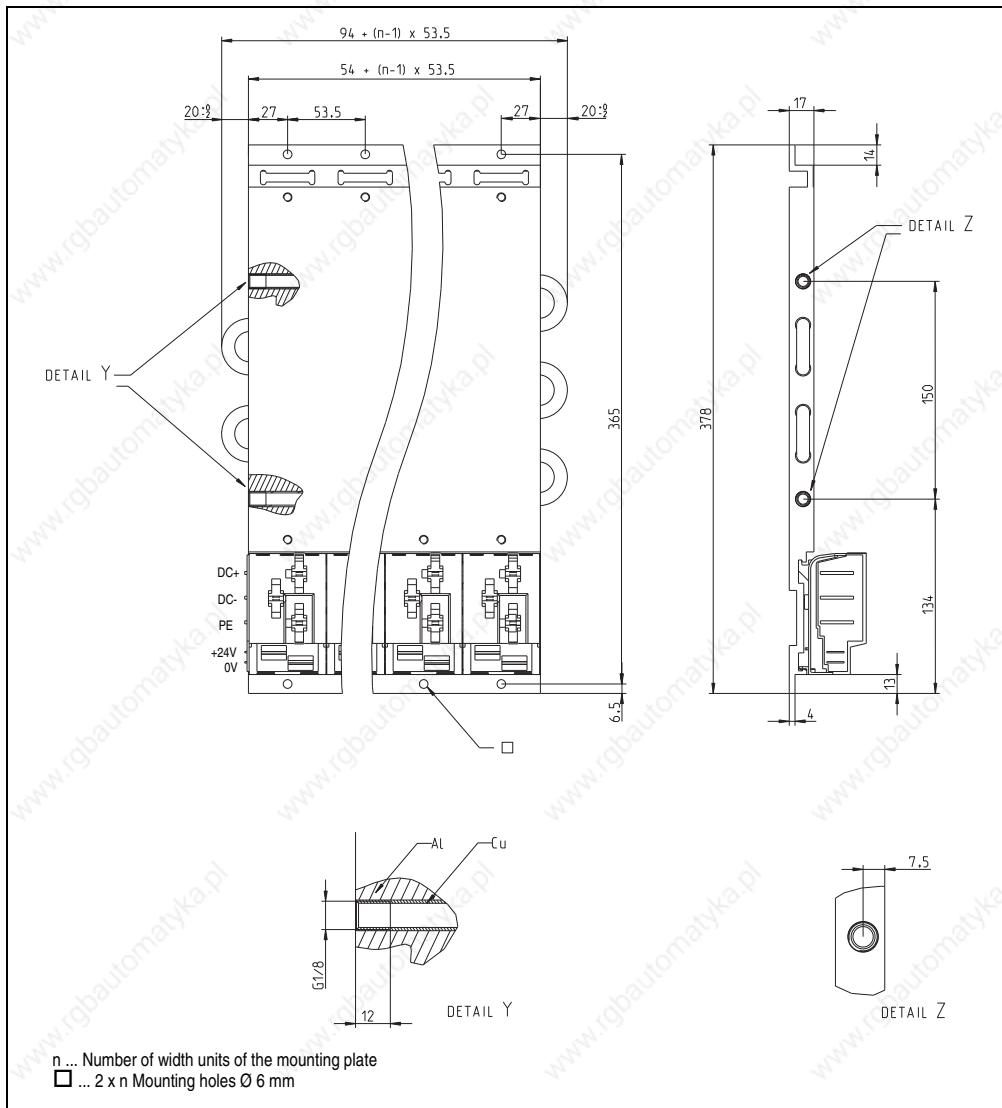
Dimension diagram and installation dimensions - 8B0MnnnnHC00.000-1
